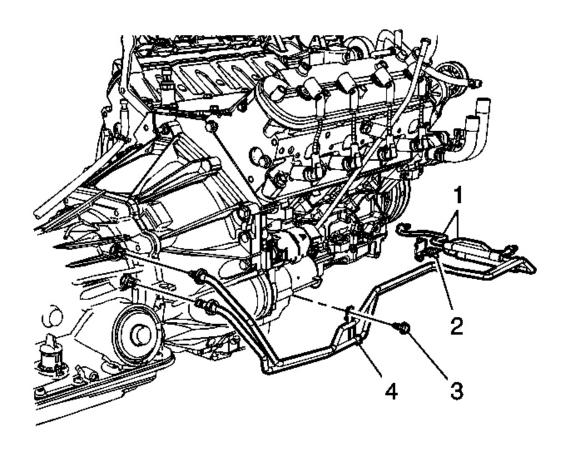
Transmission Cooler Lines And Brackets Courtesy of GENERAL MOTORS CORP.
